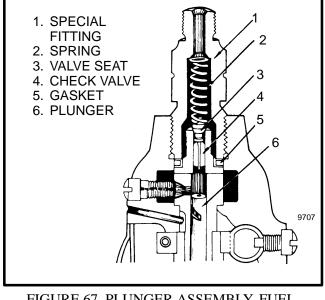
PLUNGER ASSEMBLY, FUEL INJECTION PUMP, MODEL PE4A
